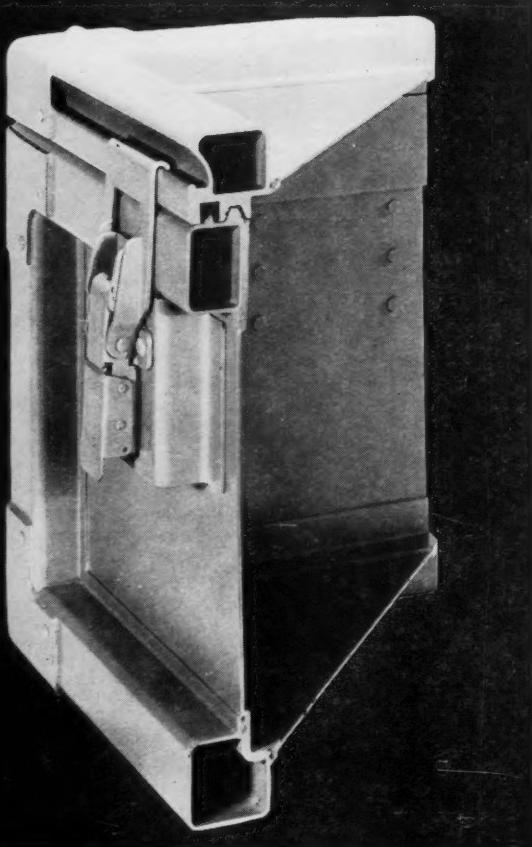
The use of adhesives to assemble modular shipping containers reduced design and production costs approximately 25%.
